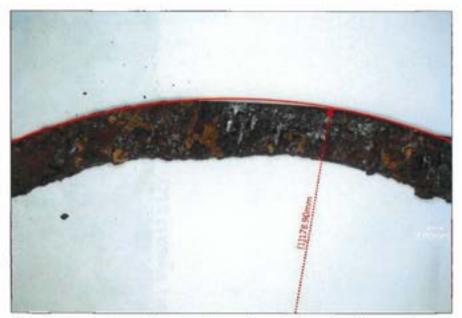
Estimated diameter of curved metal piece found between head and tubesheet on inlet/outlet side of chiller (179 mm or 7 inches).
